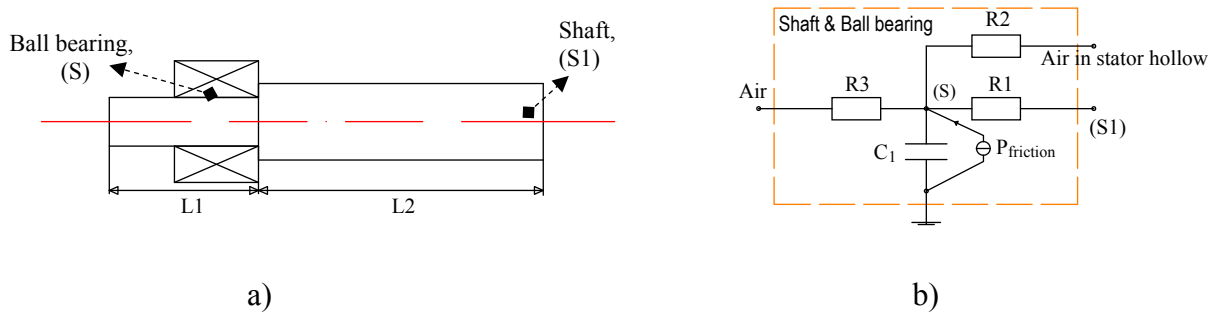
a) Sketch of shaft and ball bearing, b) Thermal model of shaft; where, (S) is the point of contact of the shaft and ball bearing and (S1) is the point of contact of the shaft and the end side frame.
